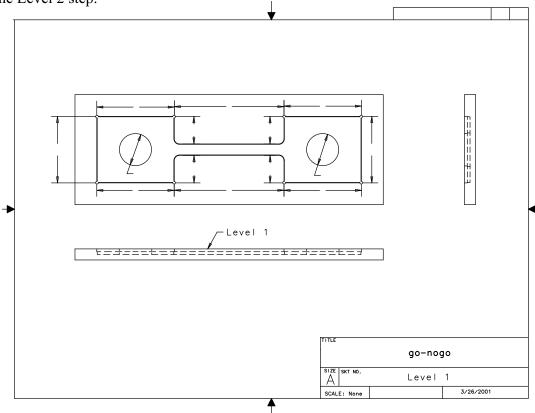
Typical go/no go gage for overall geometry checks of impact test specimens.
